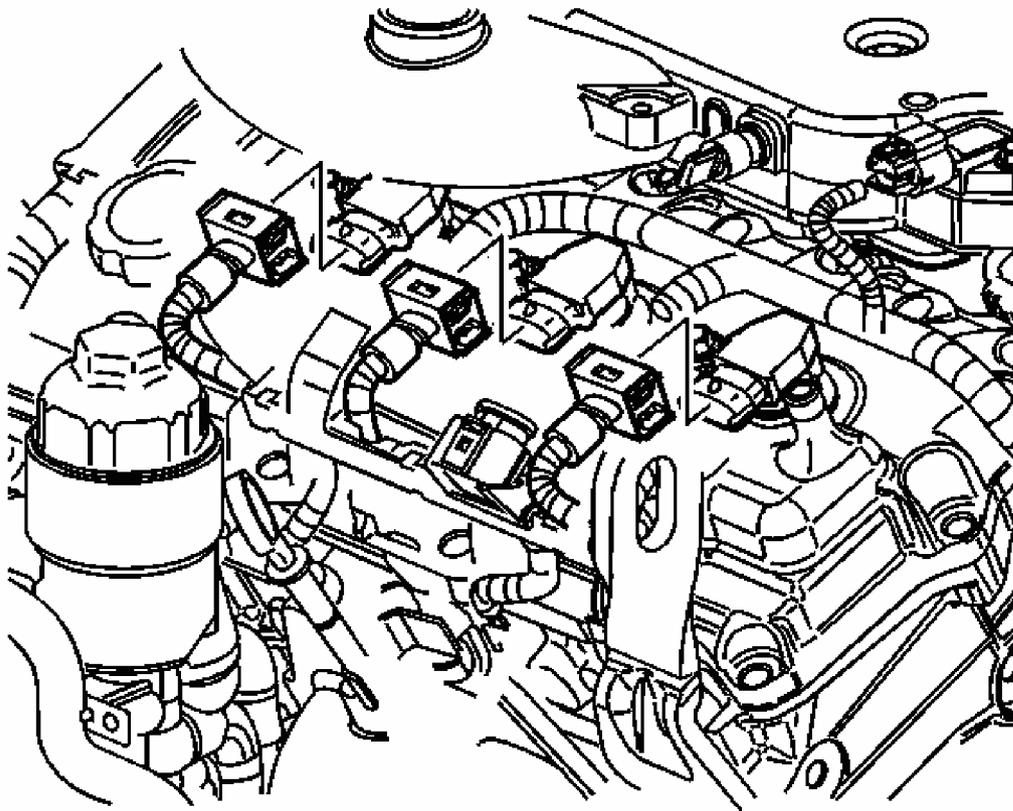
View Of Left Ignition Coils Wiring Harness Connectors
